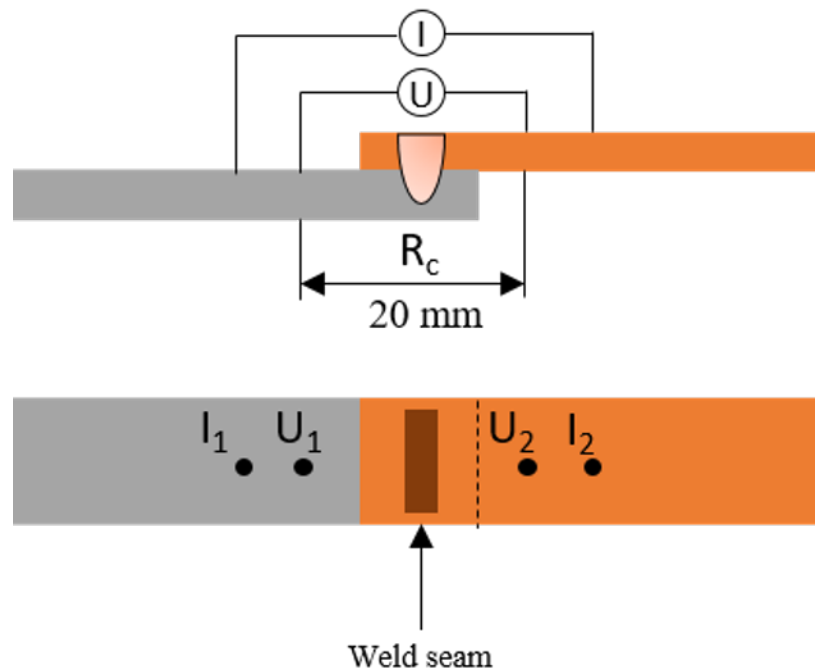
Electrical contact resistance setup for tab welding configuration.
